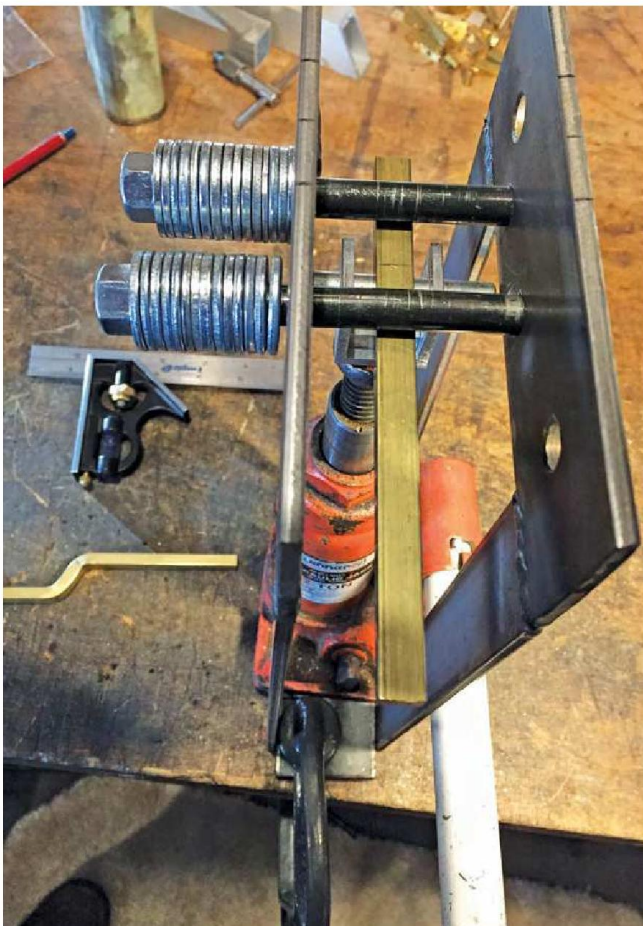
A hydraulic jack mounted in a fixture for armature bending.
